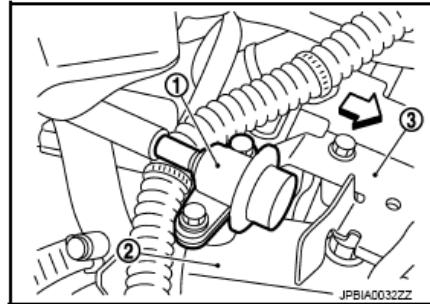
Identifying Fuel Feed Hose, Fuel Sub-Tube And Harness Bracket
